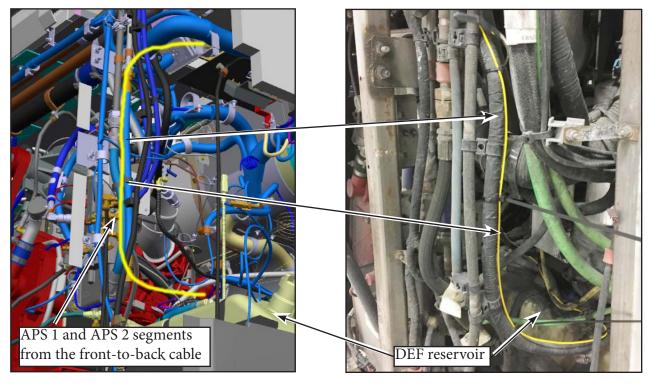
Front-to-Back Cable Routing in the Hydraulic Oil Tank Area
